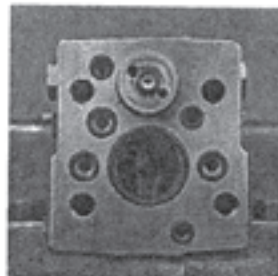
End Cap O-Rings Installed for HC Control
